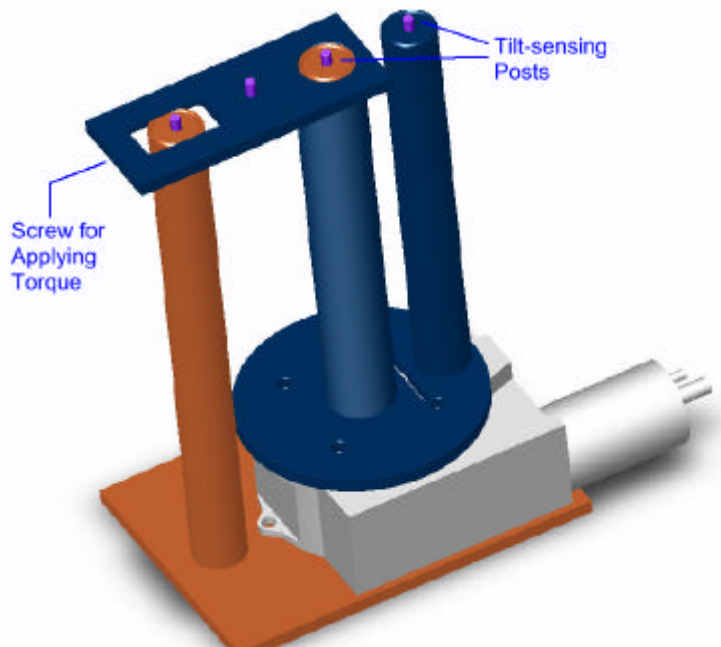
Jig for testing the rotation stage. The blue parts form a welded unit, and so do the red parts. A screw exerts a torque on the stage by forcing the long red post and the top plate together. That was replaced by a weight, attached to a string, which runs through a pulley. The tilt is sensed by measuring the distance between the tilt-sensing posts.
